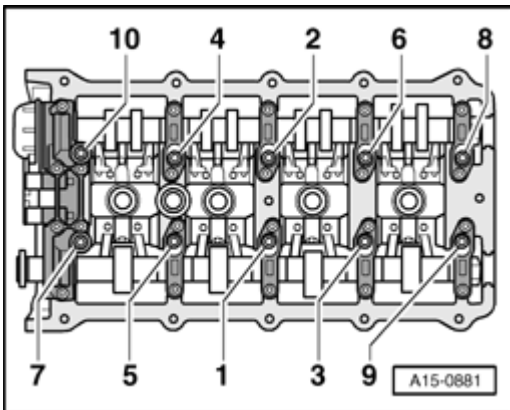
Tightening Cylinder Head Bolts In 4 Stages In Tightening Sequence
